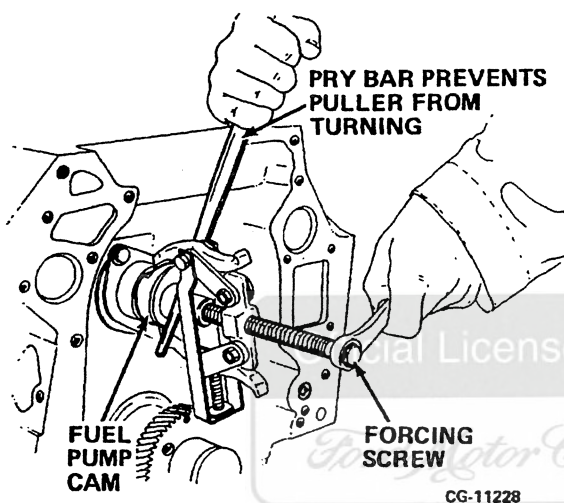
Removing Fuel Pump Cam Using SE-4156 Puller
